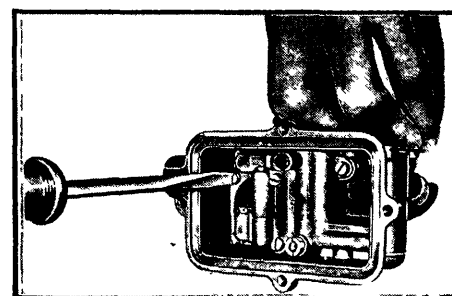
Removing complete metering unit. Holley Visi-Flo carburetor
